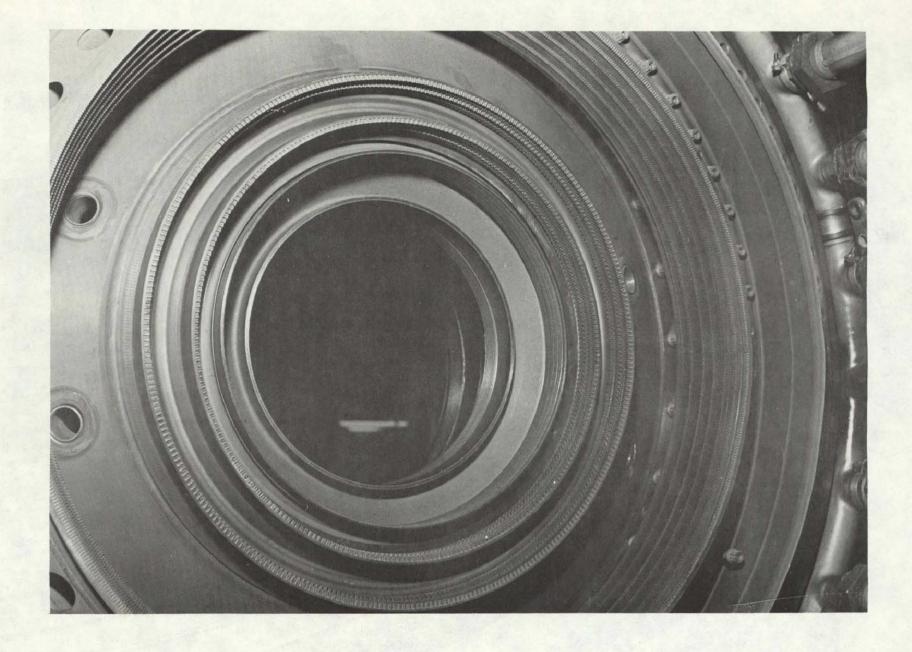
Compressor Rear Frame, Forward Seals - Overall View, Installed.
